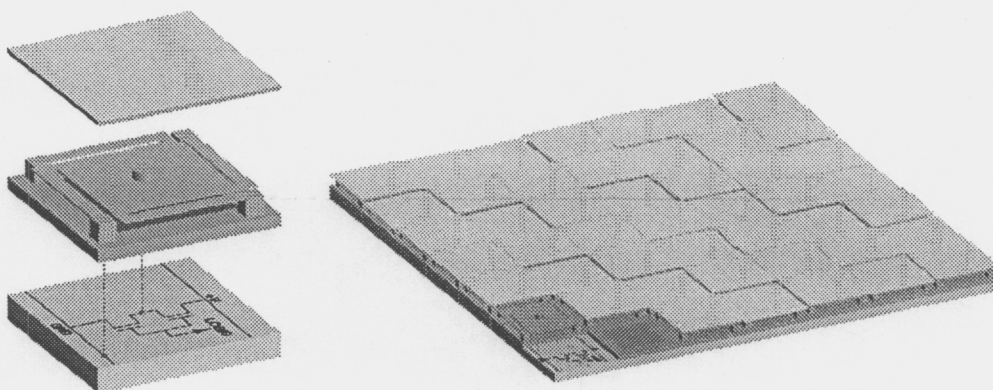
Conceptual drawing of a MEMS SLM assembled by modular integration of separate mirror elements, micromachined actuators, and drive circuitry that are bonded together.
